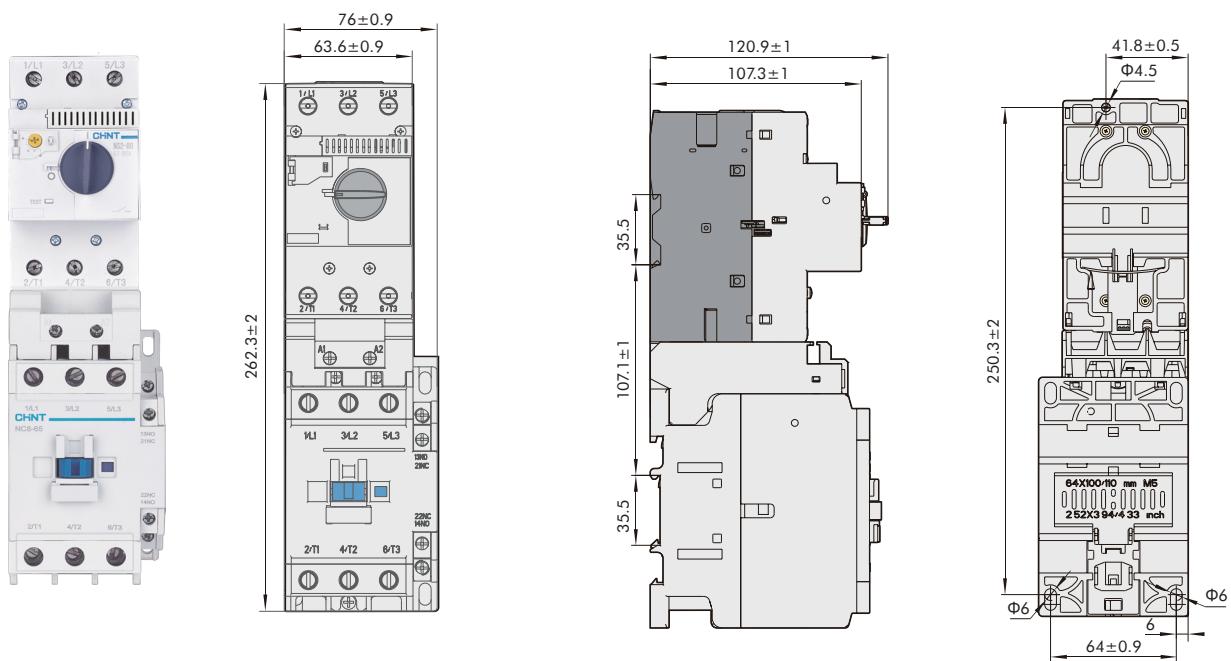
Outline and Instaling Dimensions of CC-3(NS2) after assembly with the starter and contactor
